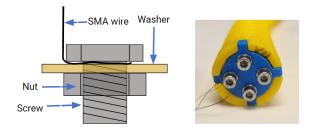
Fixed SMA wire attachment. Left: Diagram. Right: Prototype
